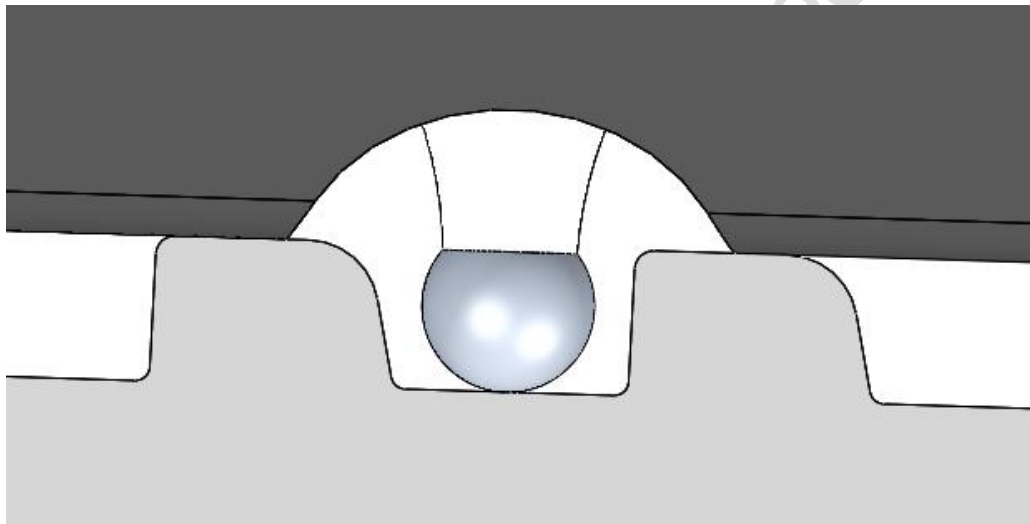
Thread Height Contact Point (Buttress Thread Height)
